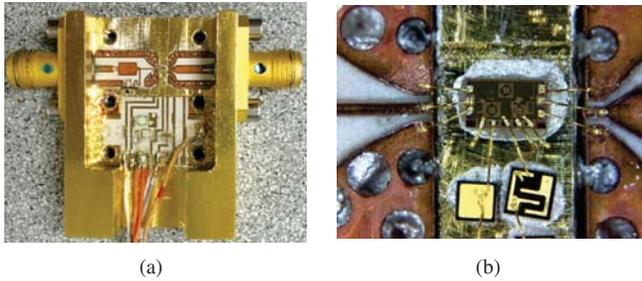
The LNA assembly. (a) A photograph of the LNA package. (b) A close up picture of the LNA chip mounted inside the package.
